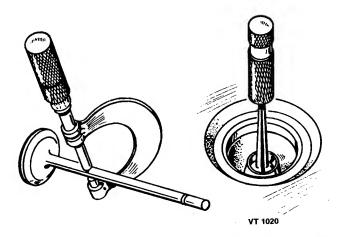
VALVE STEM AND VALVE GUIDE INSPECTION
